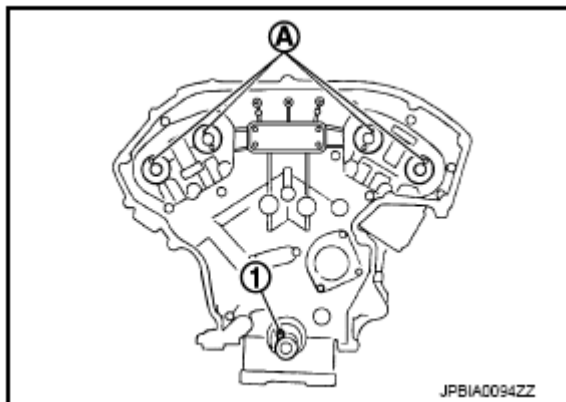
Identifying Crankshaft Key And Dowel Pin
